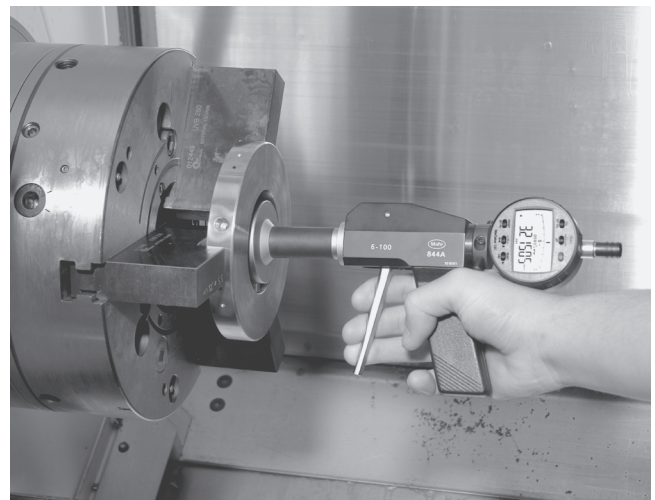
Using the expansion plug bore gage (Courtesy Mahr Federal Inc.).
